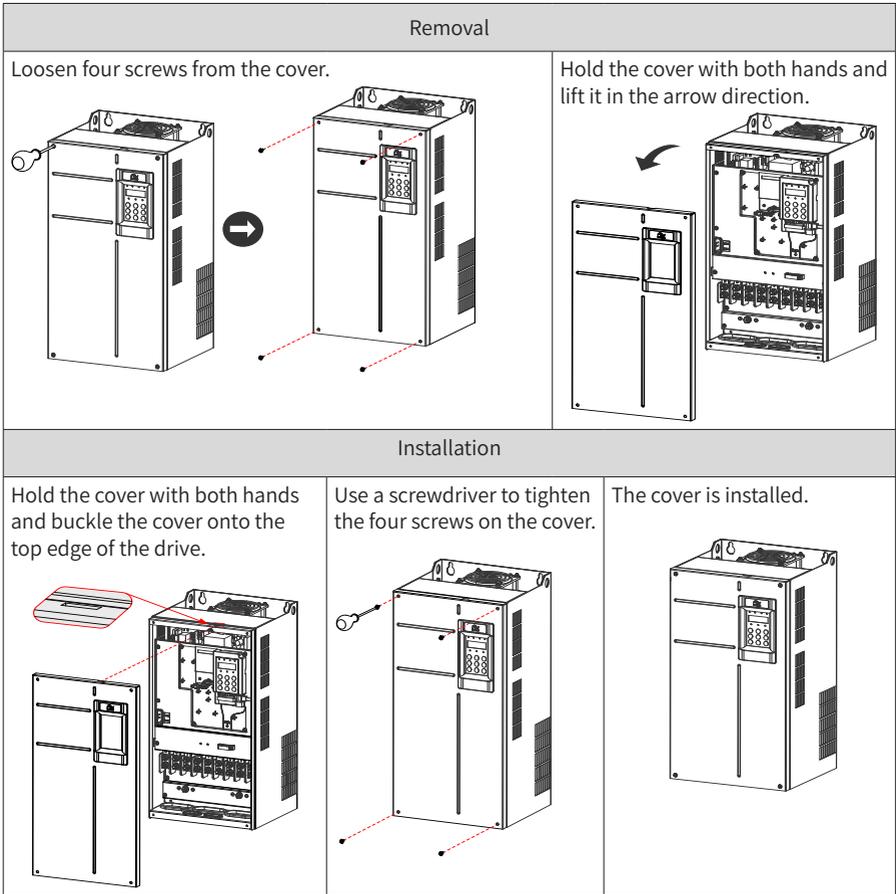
Removing and installing the cover of 45-160 kW drive models
